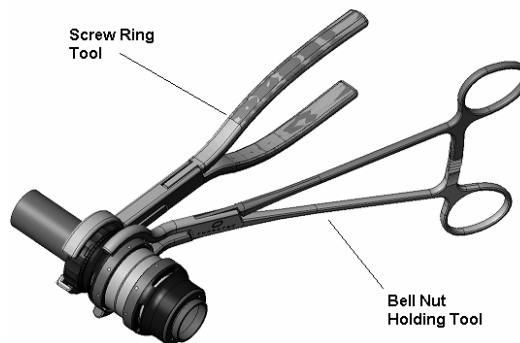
Unscrewing the Screw Ring using the surgical tools.
